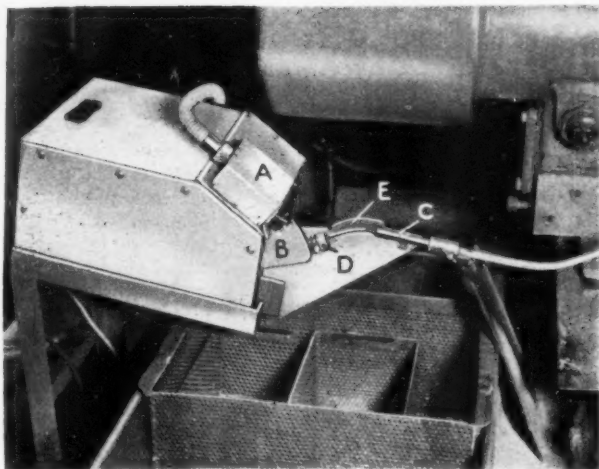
Close-up View Showing the Gauging Head, and the Automatic Feed Arrangement
